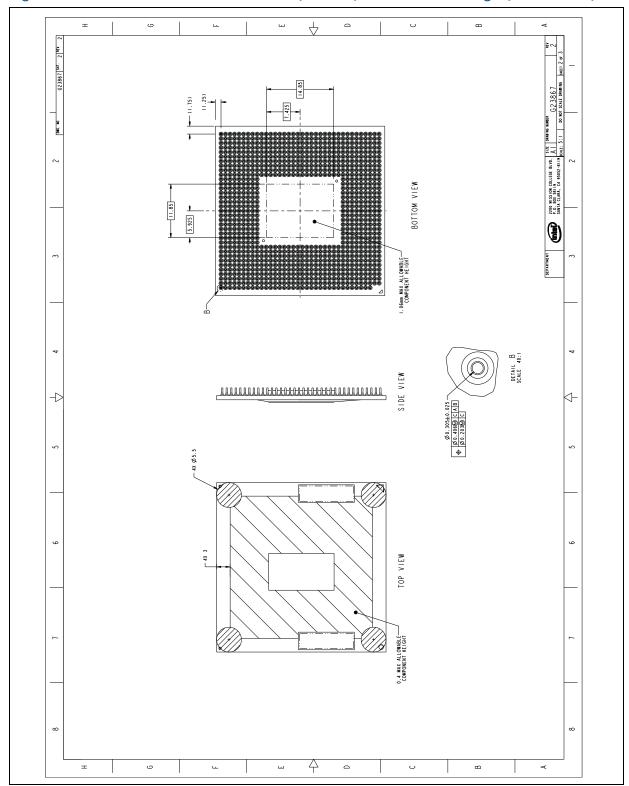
Processor rPGA988B 4C/GT2 (E95127) Mechanical Package (Sheet 1 of 2)
